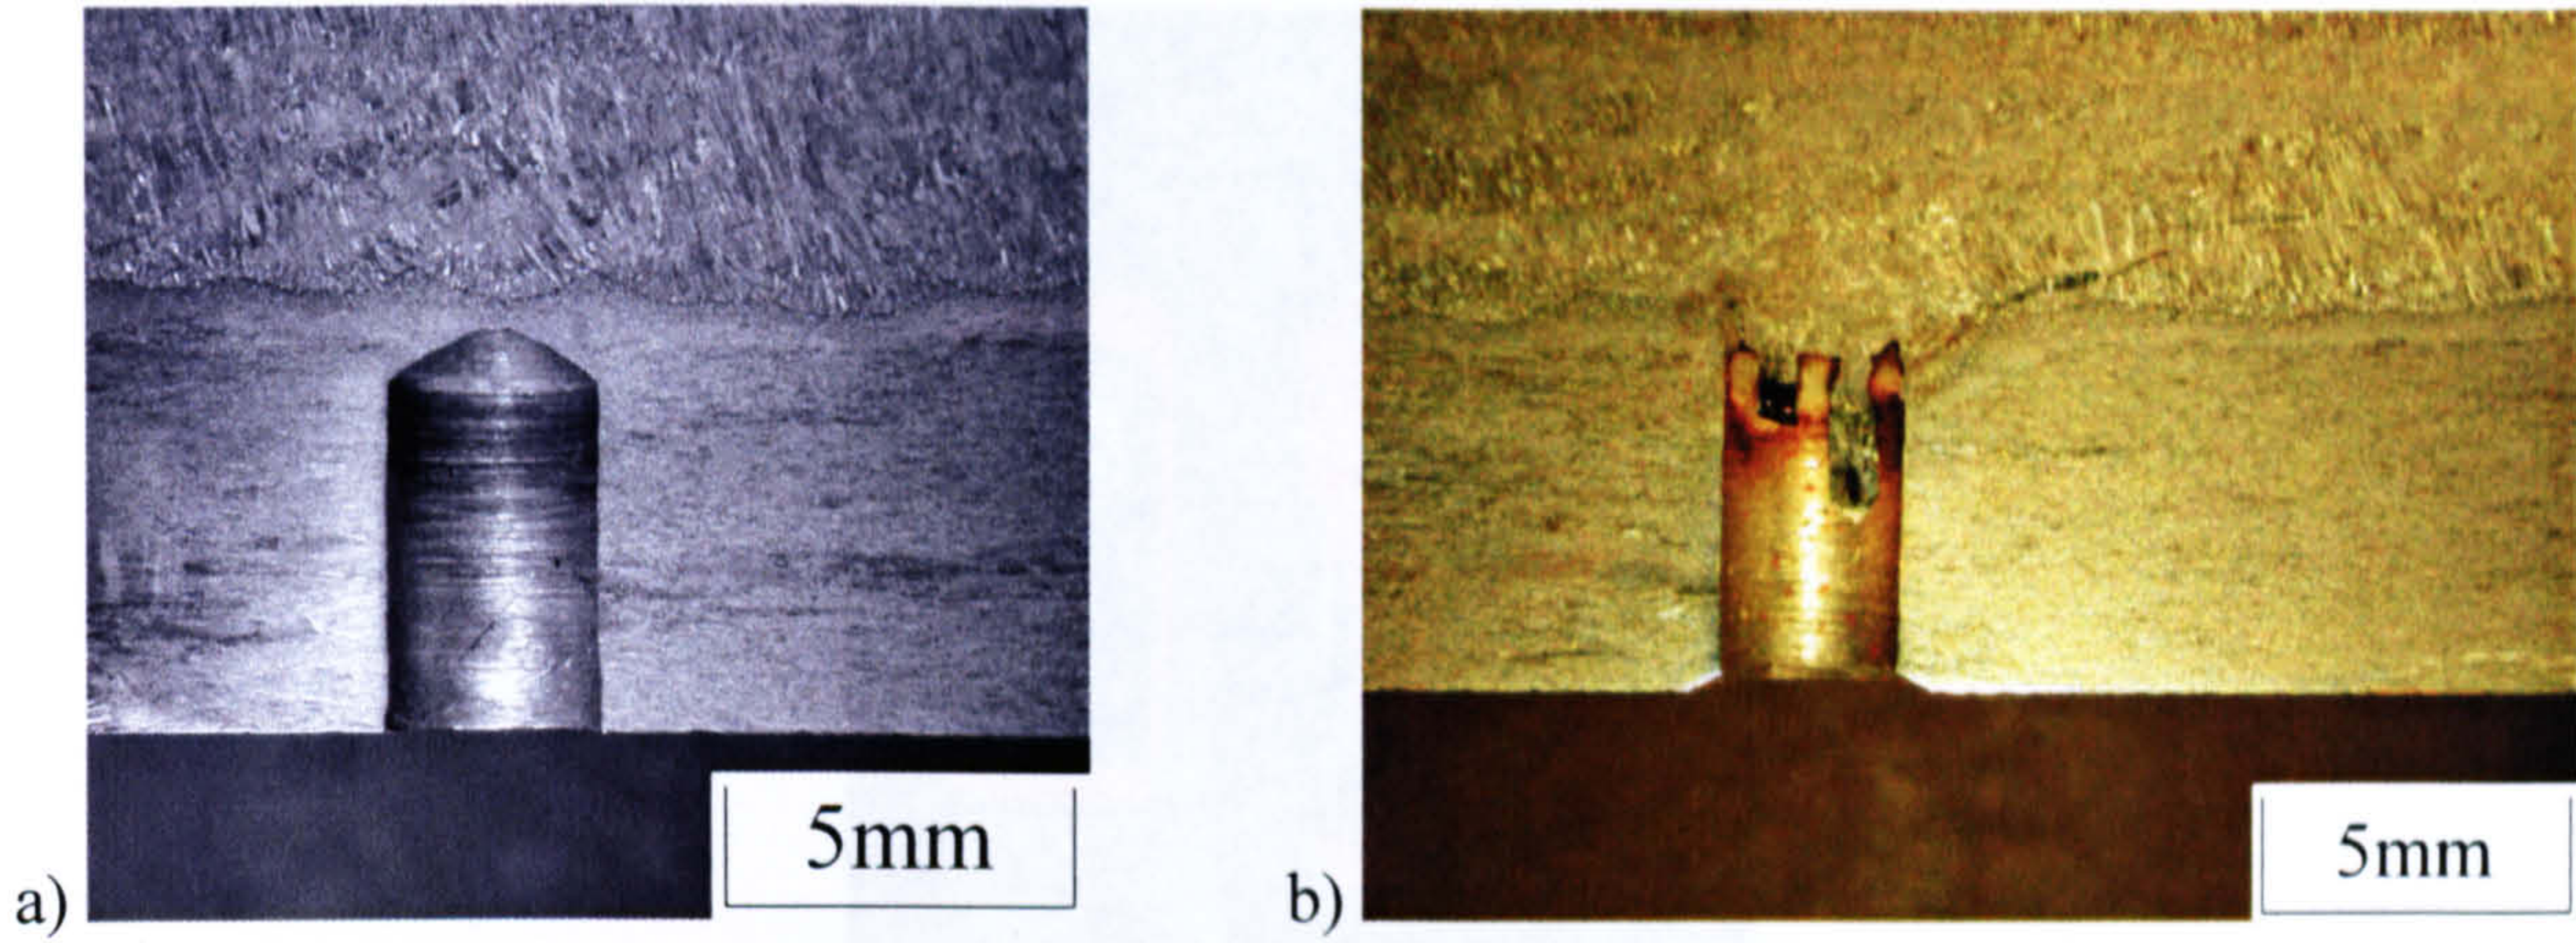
Internally placed thermocouple sections a) example of typical drilled hole b) thermocouple section after welding showing Pt limbs extending down hole
